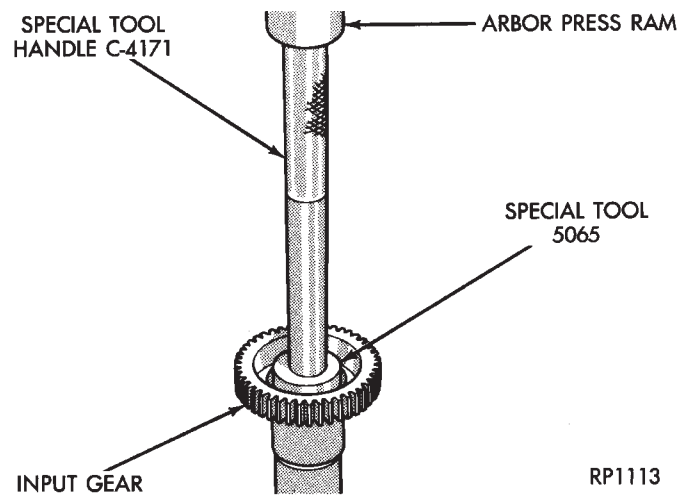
Installing Mainshaft Pilot Bearing In Input Gear
